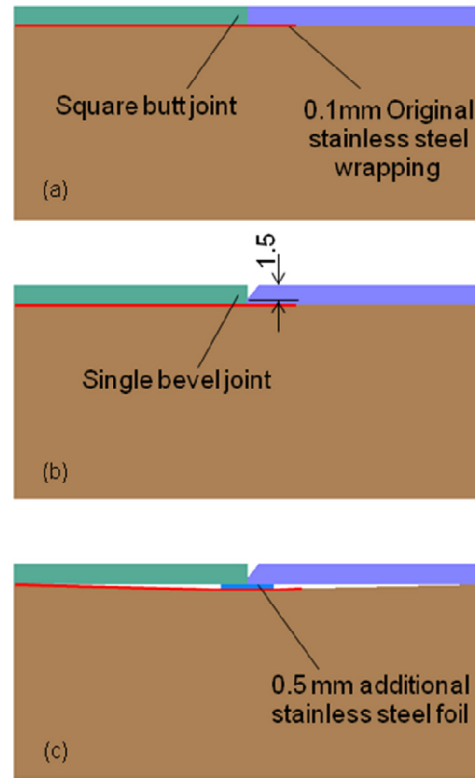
Butt weld structure sketch for experiment, where (a) is the square butt joint sample, (b) is the single bevel joint sample, (c) is the single bevel joint + additional strips.
